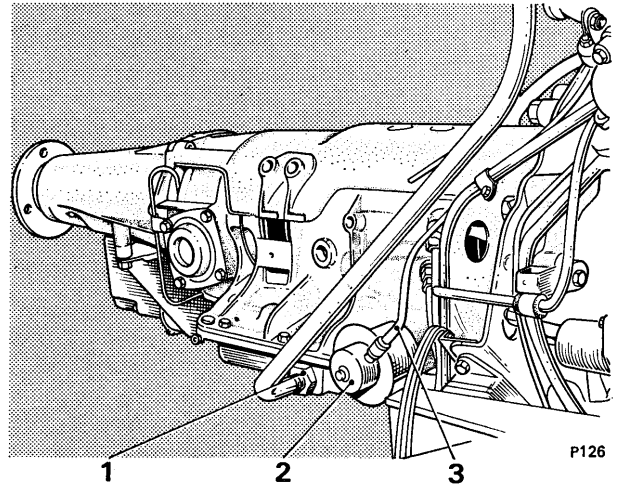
VACUUM MODULATOR AND VACUUM PIPE
